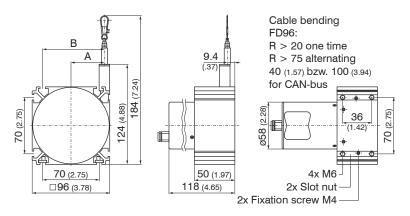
Dimensional drawing ... - FD96 - CA - P, dimensions in mm (inches), not to scale
